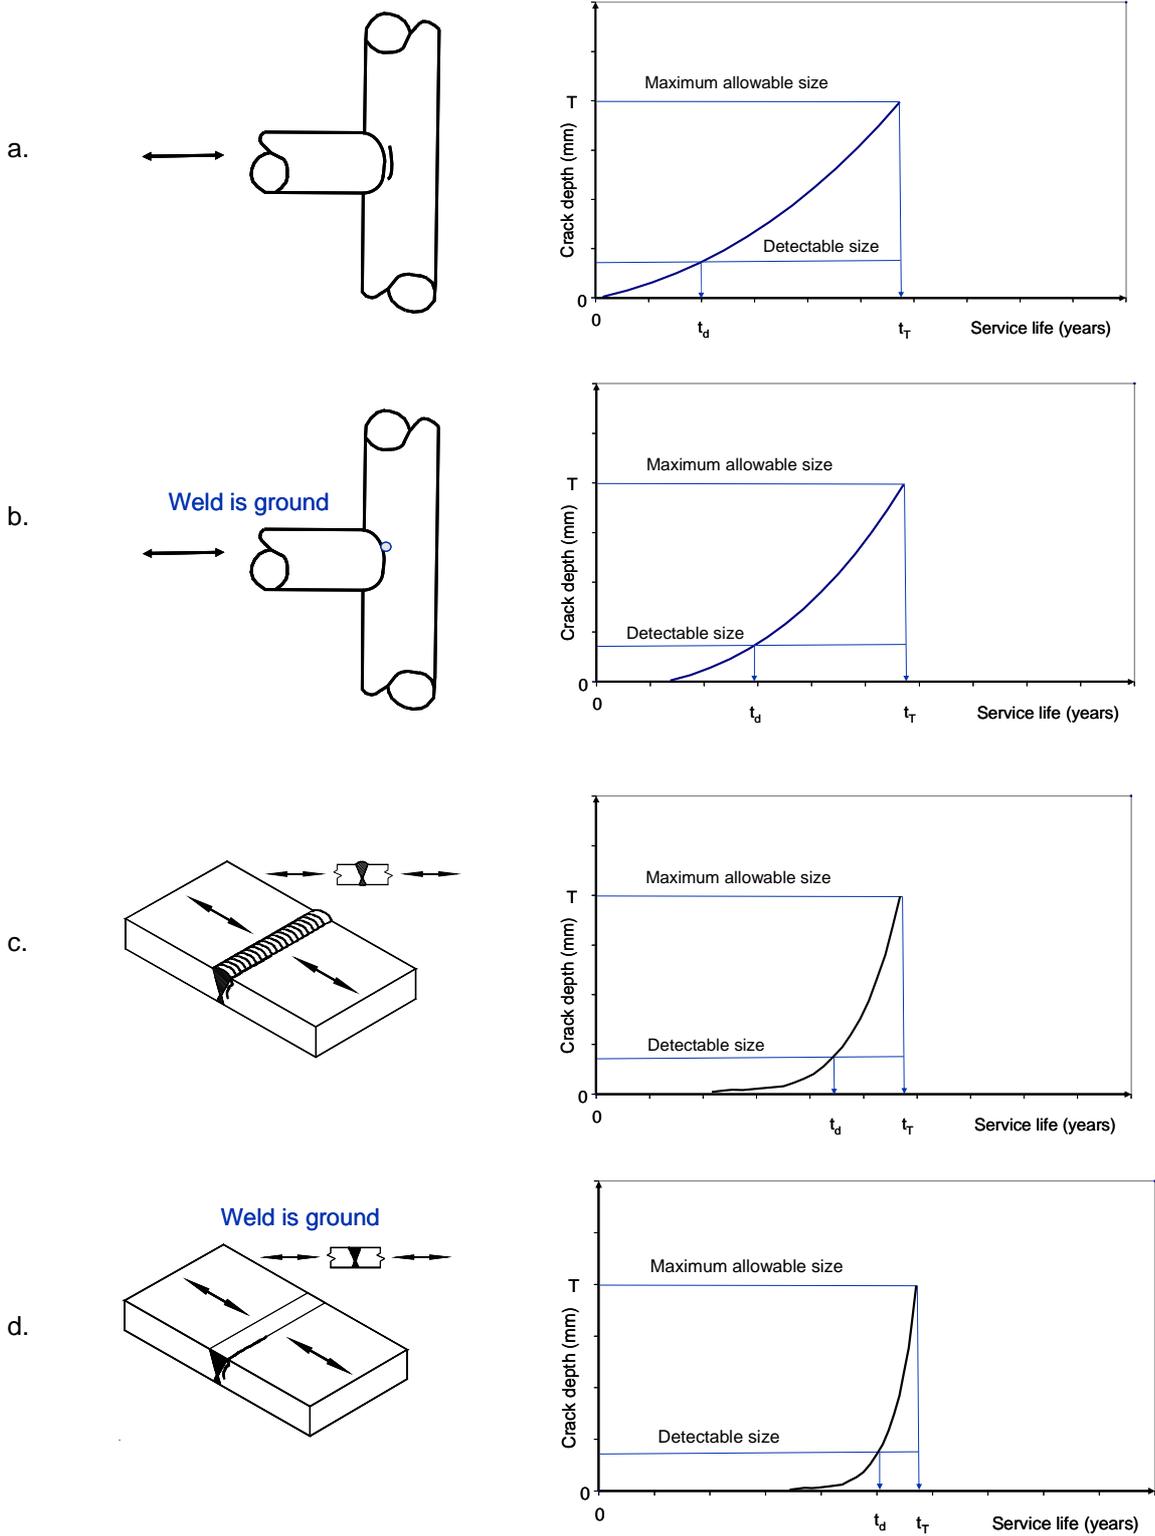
Sketch showing difference in crack growth for as welded and ground connections
